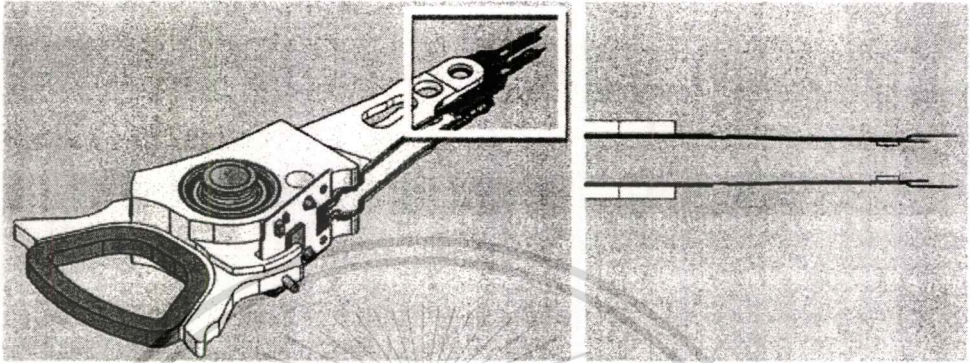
Head Stack Assembly and zoom in Head Gimbals Assembly 2 heads
